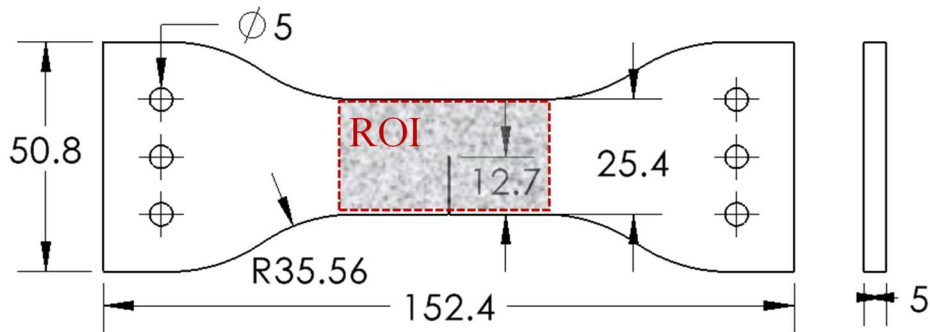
Arcan specimen geometry. (All dimensions are in mm)
